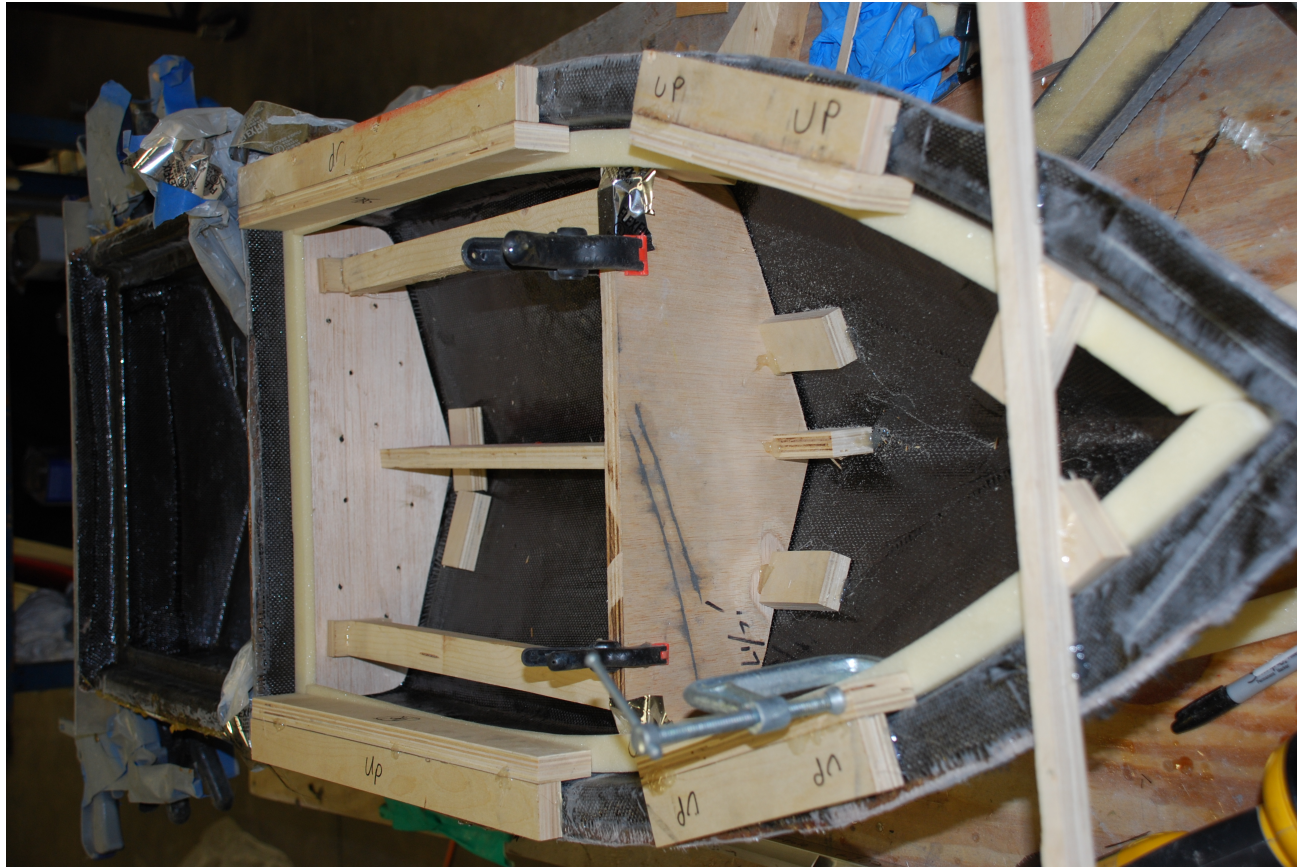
Forebody Construction: Installation of the Stiffeners
